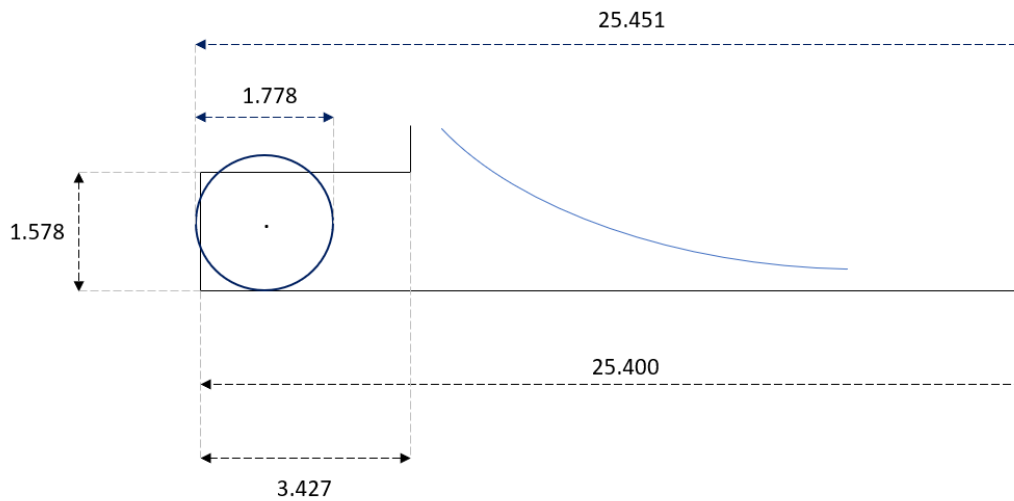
Schematic of uncompressed o-ring in half cross sectional view of chamber (millimeters)
